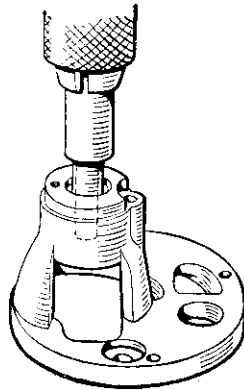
Fitting bearing bush using a shouldered mandrel
